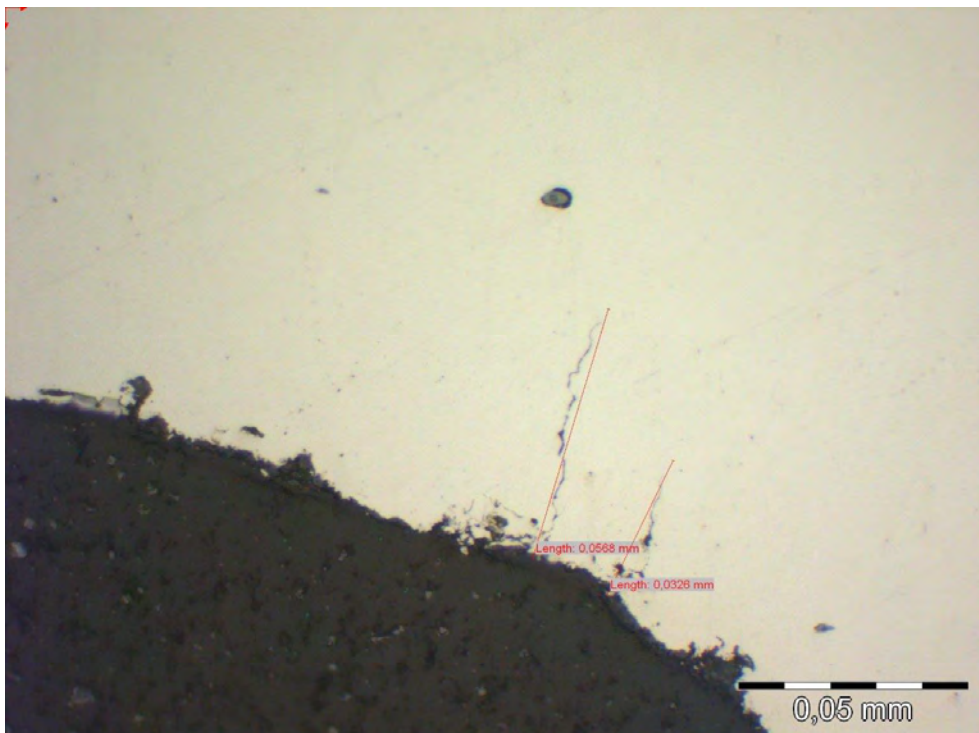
Cut six in crack at segment B, fifth ridge on barrel no. SFK 0120-A
